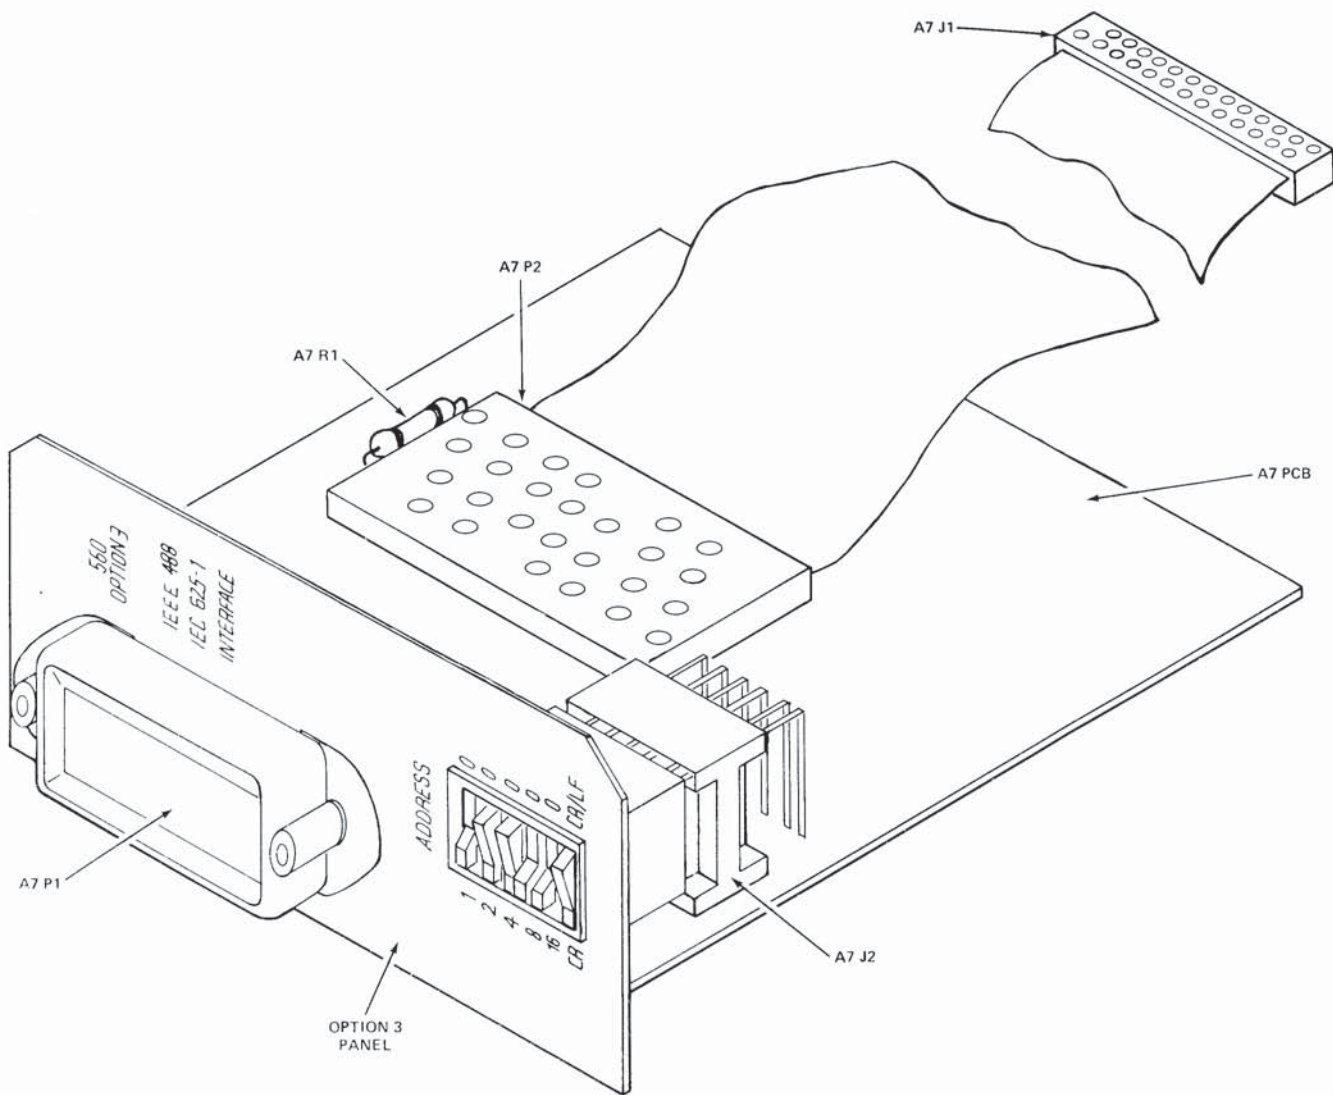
<sup>0</sup>. Option 3 Interface Panel and A7 PCB Assembly
